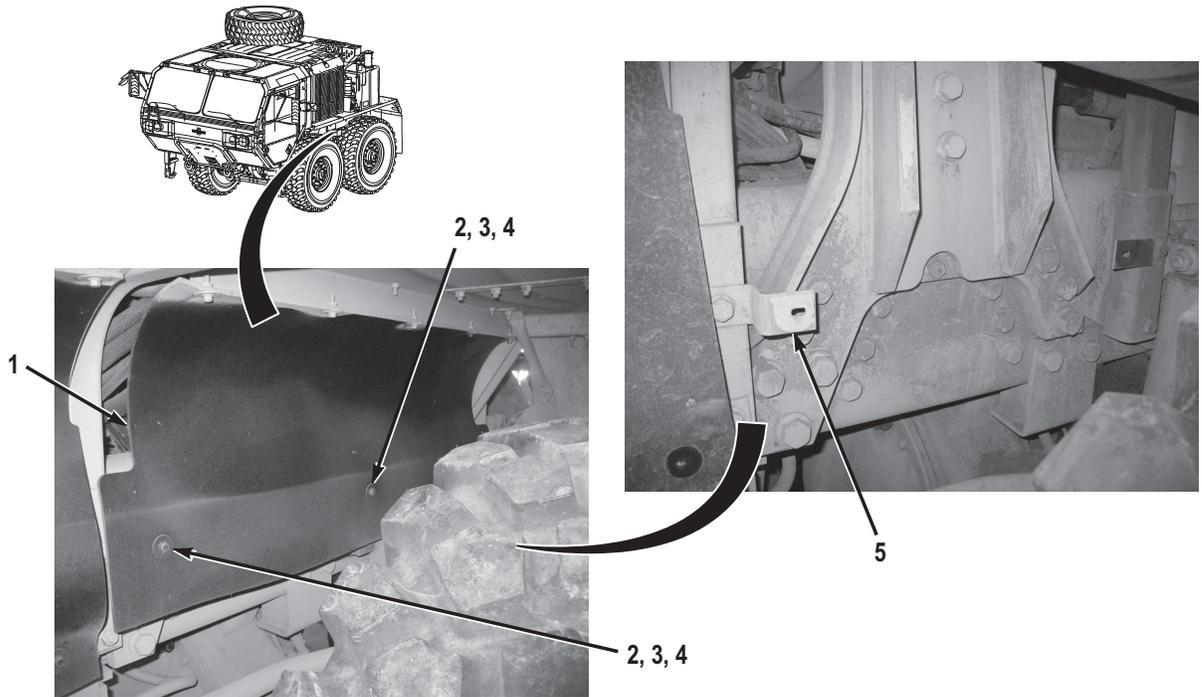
Driver And Passenger Side Rear Fender Panel Removal.
